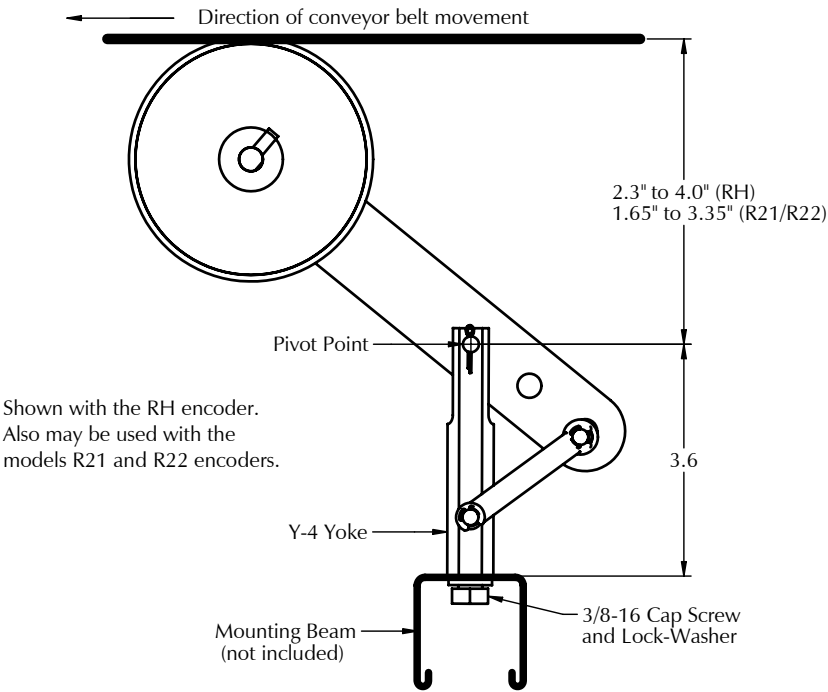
MB-UB4 Assembly (shown with RH wheeled encoder)
